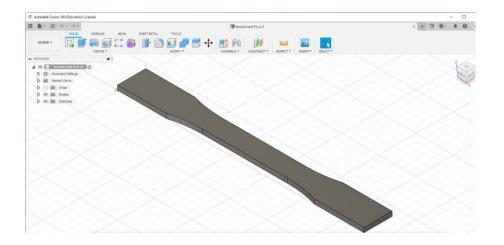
ASTM Tensile specimen 3d modeling in Fusion 360
